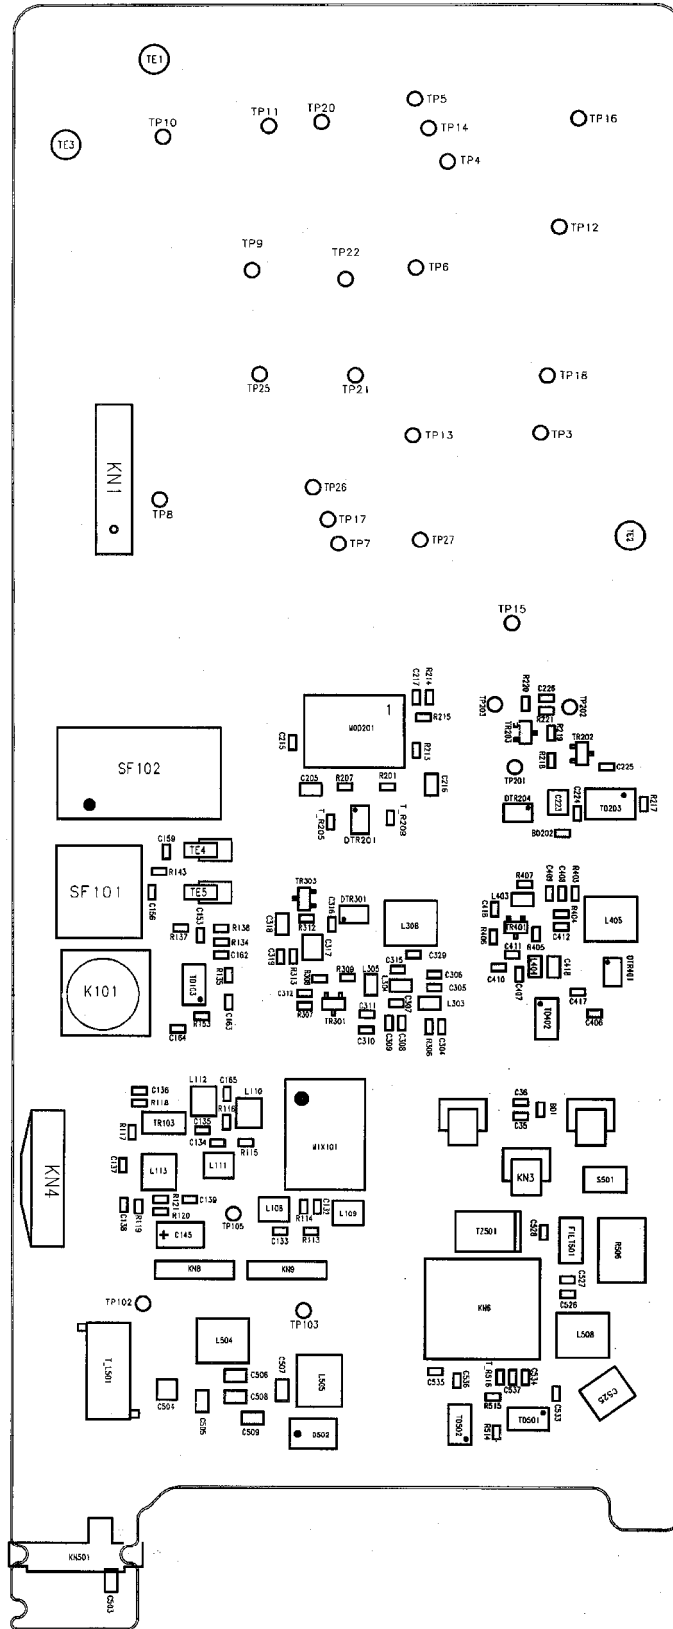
UHF RF and Control PCB Assembly Bottom Side
